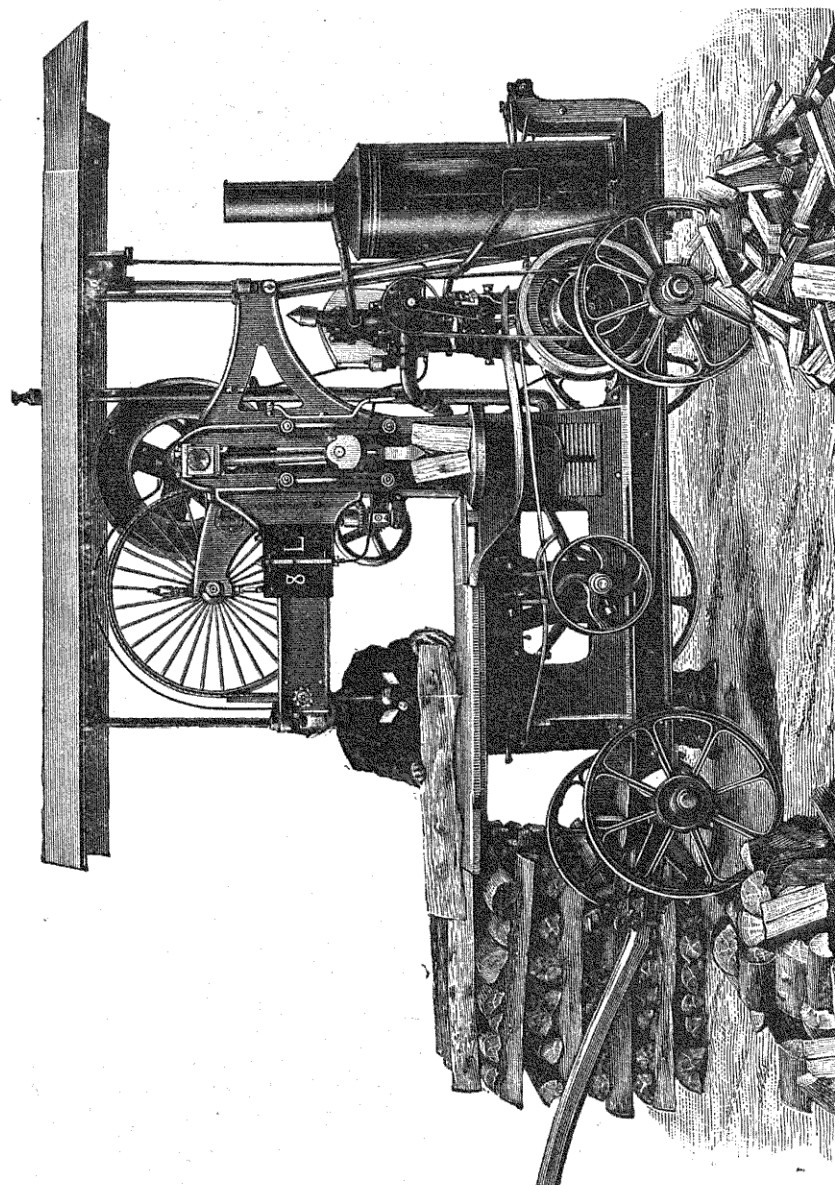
Engine-driven wood-sawing and cutting machine, built by Grob & Co., Leipzig.
